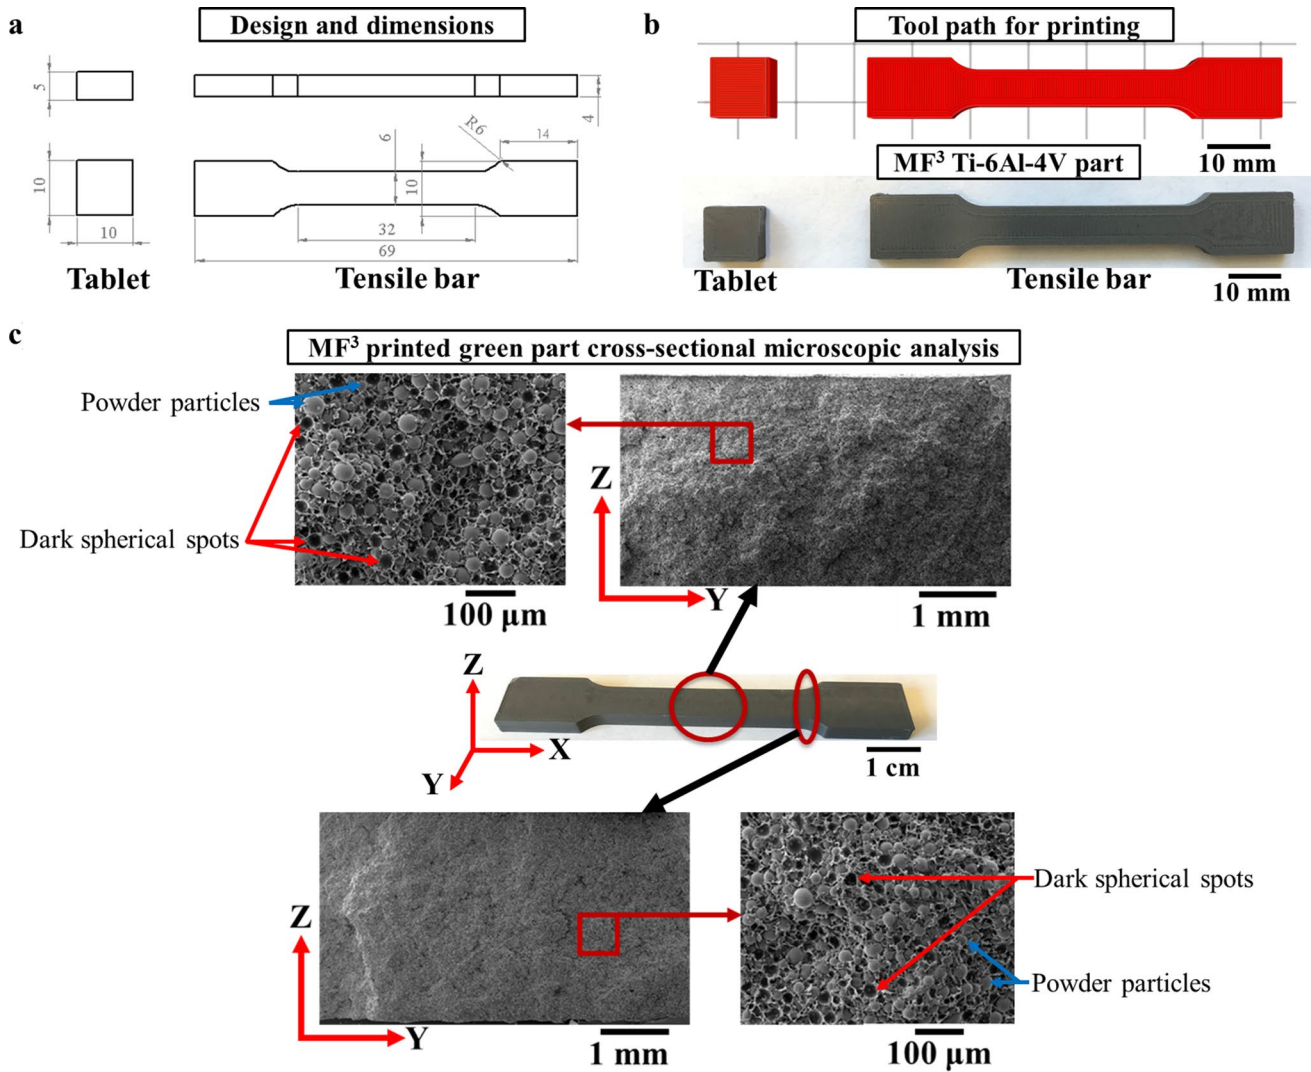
a Design and dimensions of the testing samples, b tool path can be recognized in the upper red figure, the bottom figure shows MF³ printed tablet and tensile bar in a green state, c SEM of fractured green part surfaces revealing uniform powder-polymer distribution
